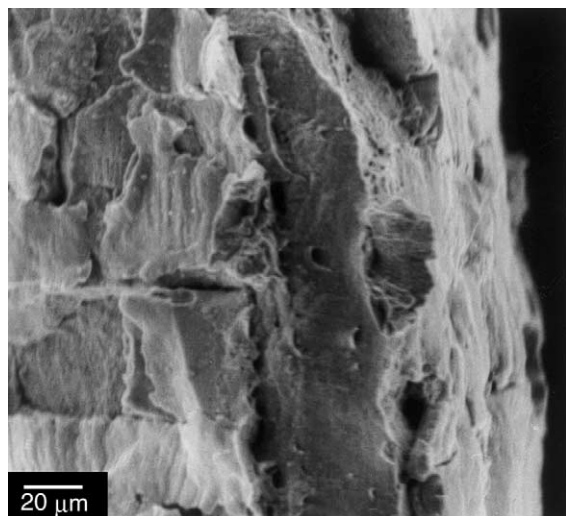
Fractograph of the Tréfimétaux CuCrZr specimen with heat treatment E (Table 2) and tested in the irradiated condition showing that the specimen failed in a ductile manner yielding a 'knife-edge' fracture appearance.
